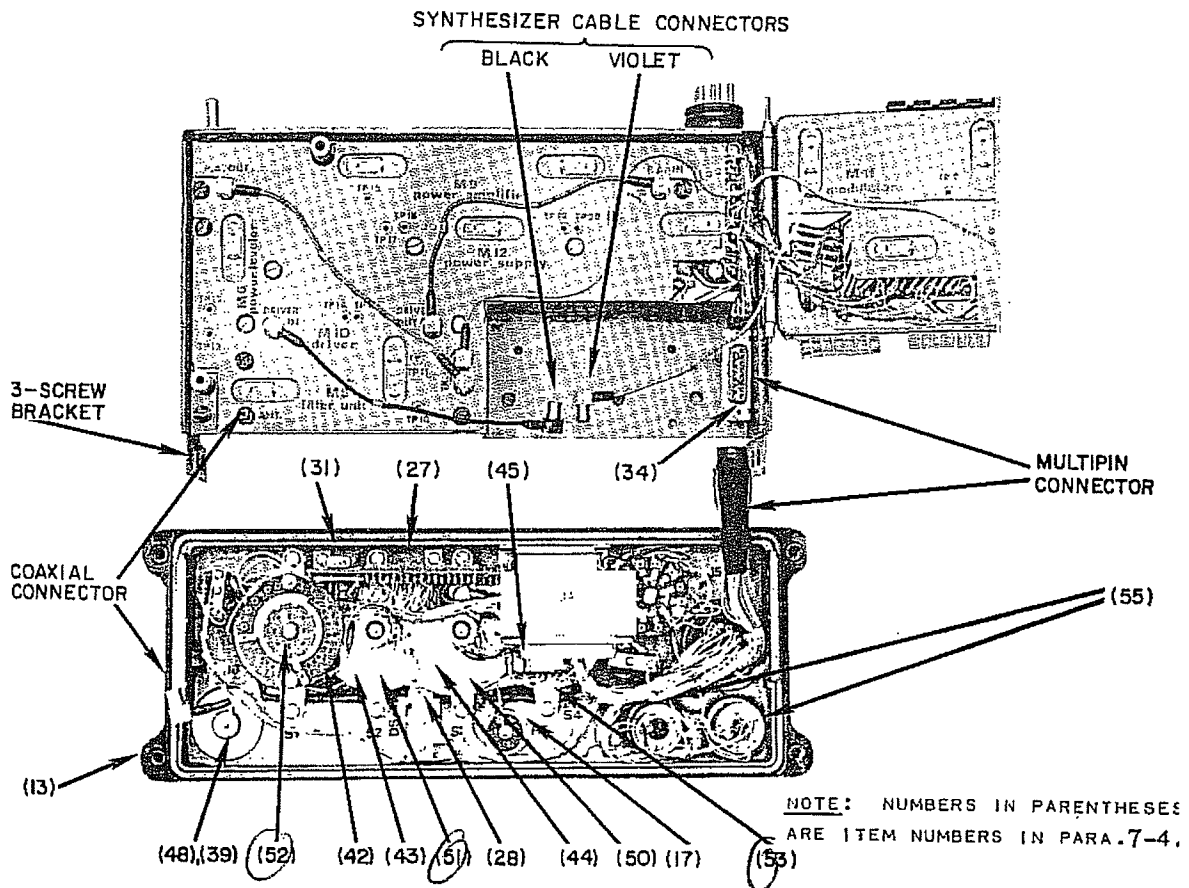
Front Panel Removed from Receiver-Transmitter RT-6241T
